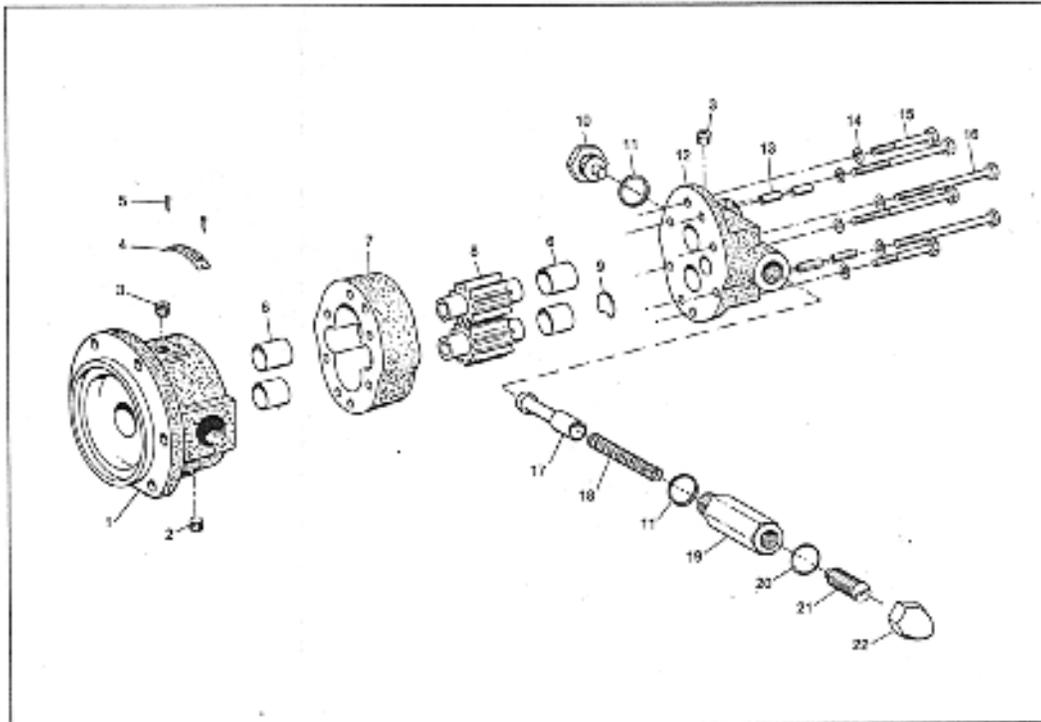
Oil Pump Assembly no. 1-13730-0000 (Right or Left Hand)
